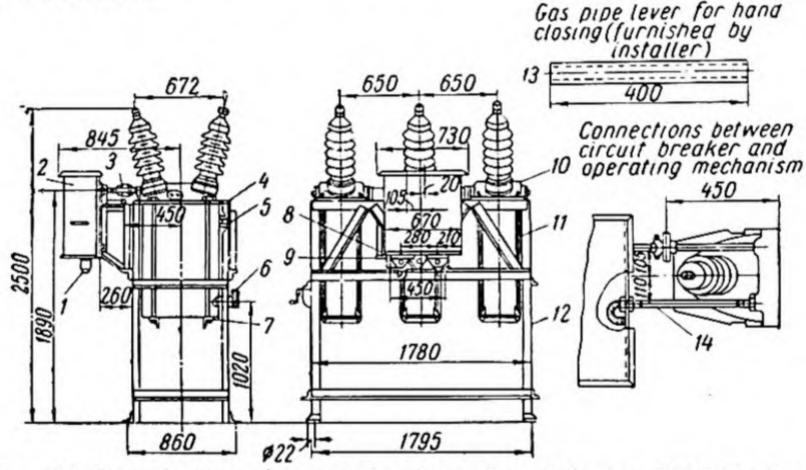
General view and installation dimensions of the type ВМД-35 oil circuit breaker:
